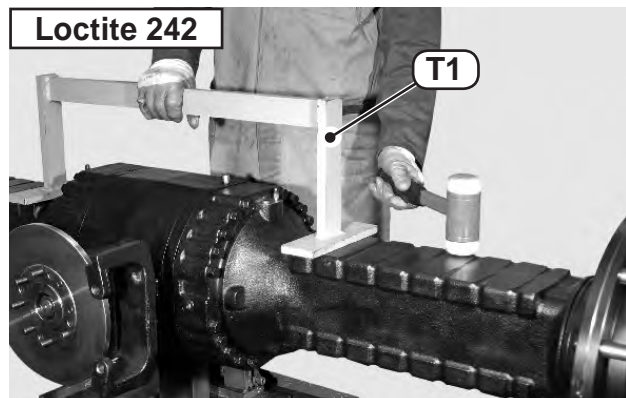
Check the flatness of the arms, using tool T1 (See drawing T1 p. 46); then lock the arms into their final position, using screws adequately coated with Loctite 242.
